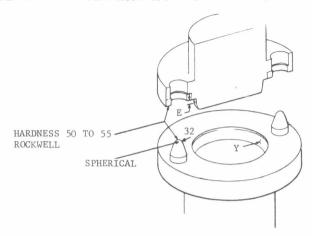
Typical pilot pins and guide ring for easing equipment assembly.
